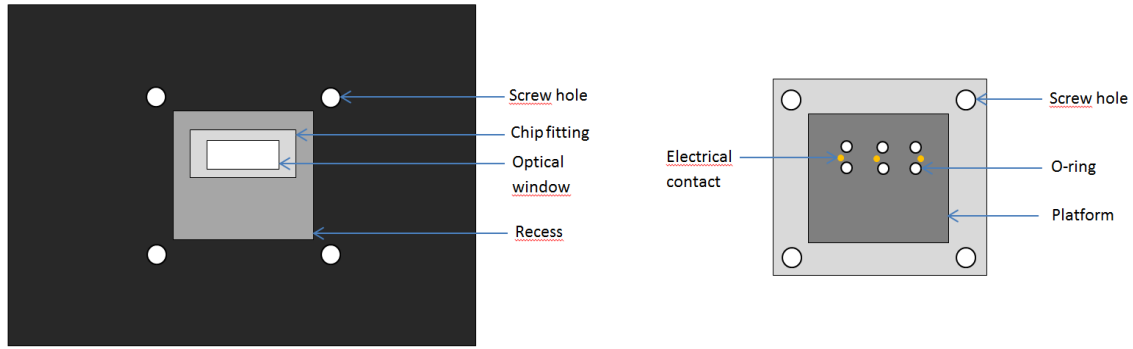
A schematic overview of the chipholder. The left hand side shows a top down view of the bottom part while the right hand side gives a bottom up view of the cover.
